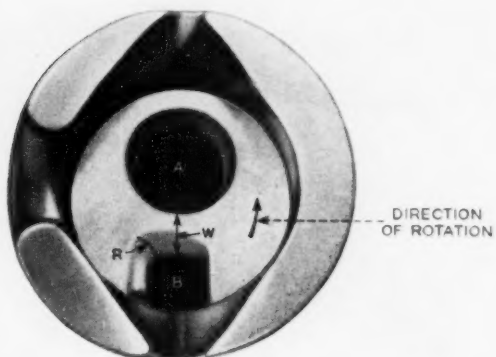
Muzzle of wiring tool showing terminal and connecting wire in position ready for wrapping.
